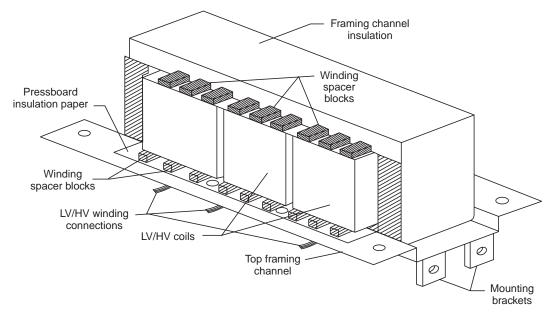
AMDT core/coil assembly (core/coil assembled-final framing)
